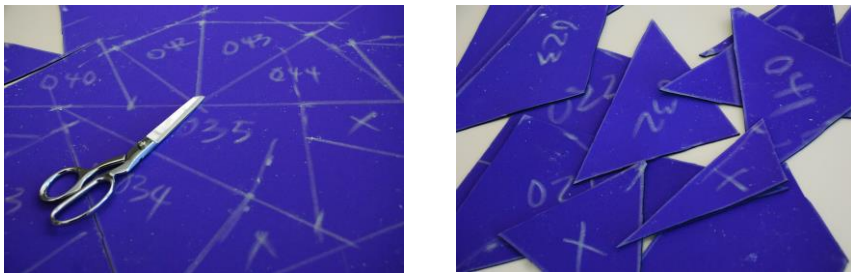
Crafting Fabrication approach to nesting shapes and cutting fabric components for the skin of the lightweight form. Components were drawn onto the fabric and cut with a scissor.
